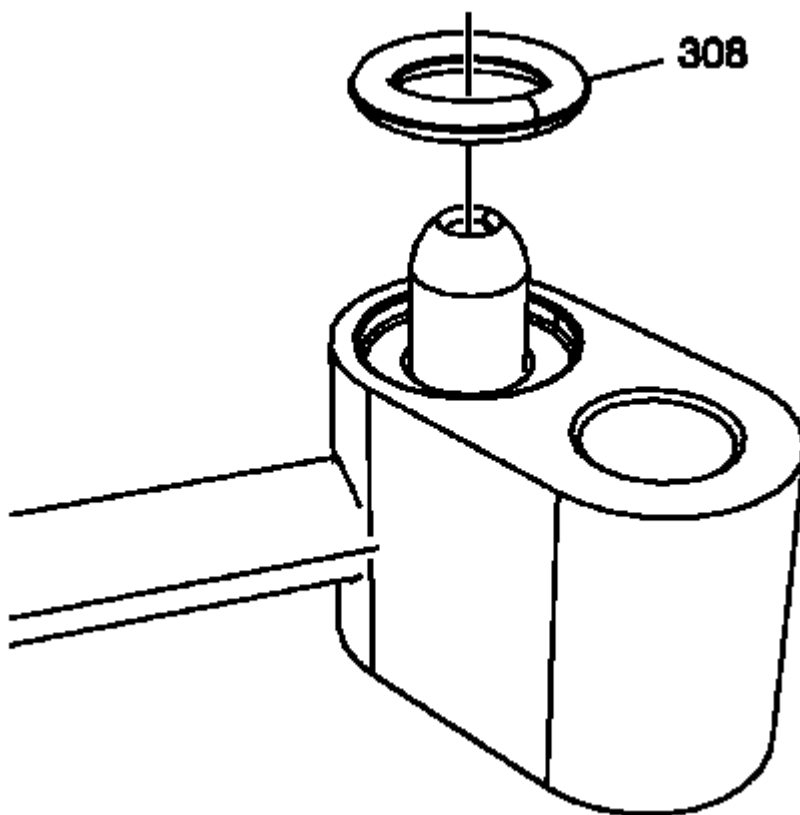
View Of Coolant Air Bleed Pipe Seal
